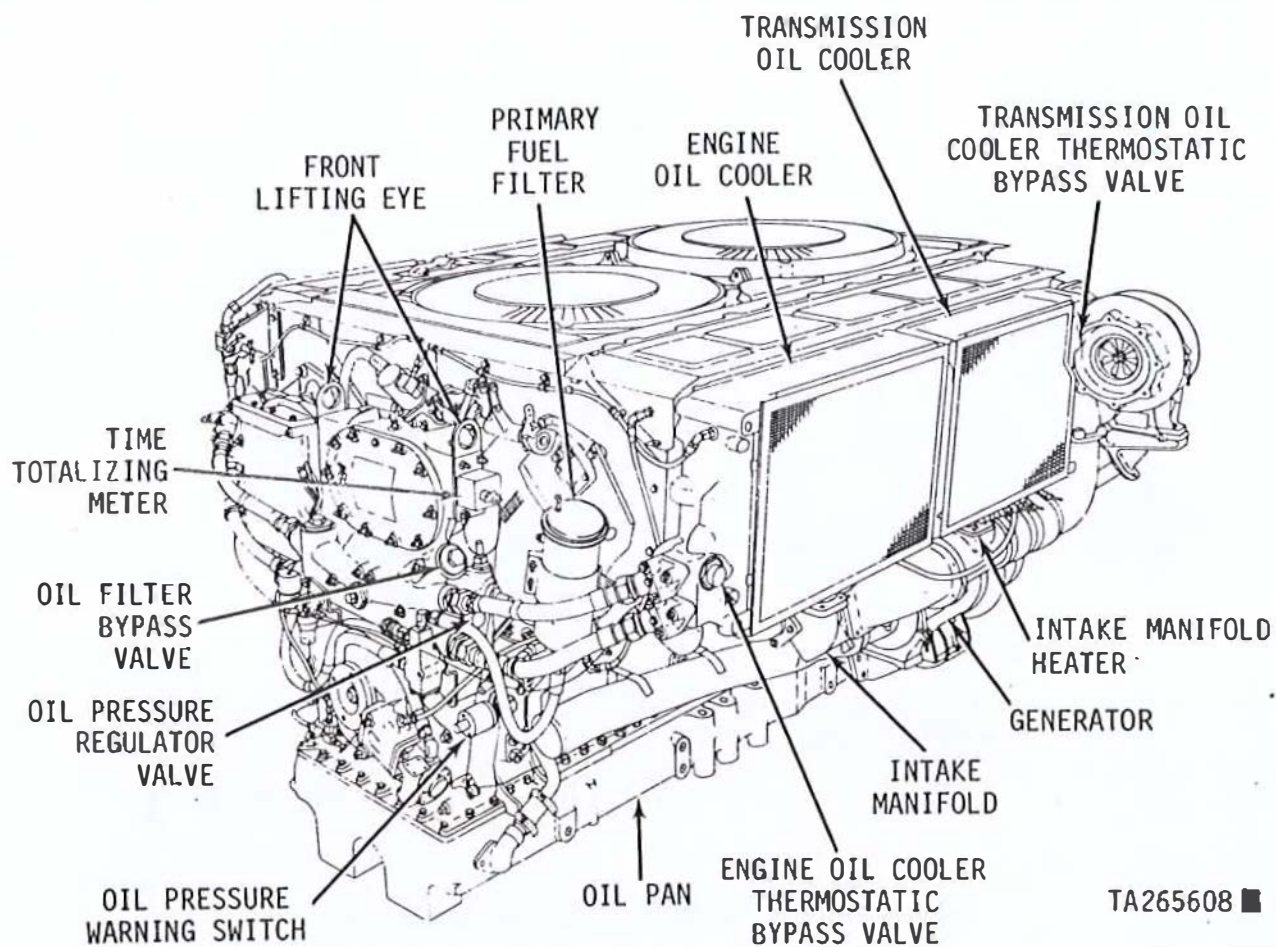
AVDS-1790-2DR engine assembly - right front view.
